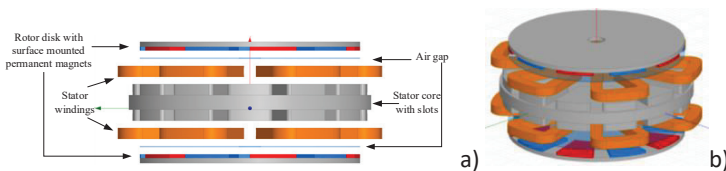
Double-sided AFPMG with two external rotors and one internal stator: a) components of the machine, b) model of the machine
